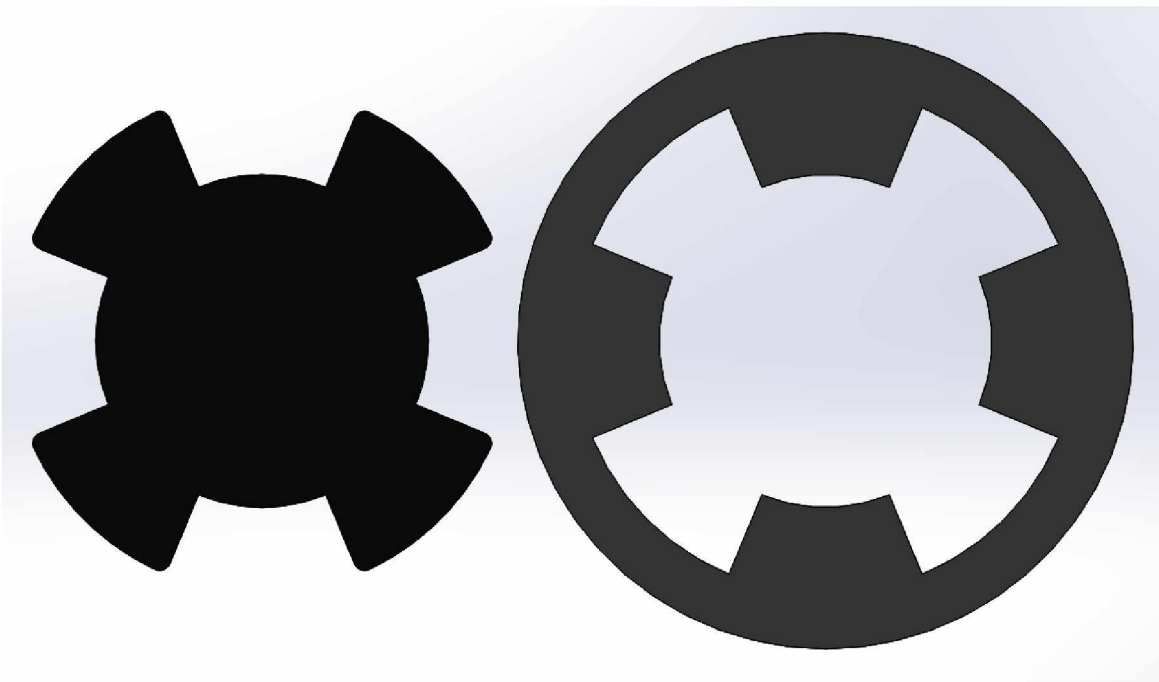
Concept for an alternative latching mechanism design with a different footprint for the landing gear (left) and a rotating receptacle (right)
